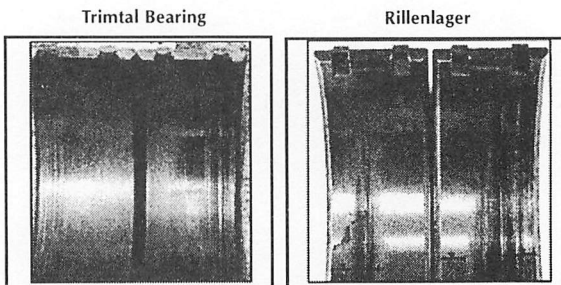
(right) Test in extreme misaligned bearing housings 5&6: Wear comparison of Rillenlager and ordinary Trimetal Bearing in the same engine after three months in service.
